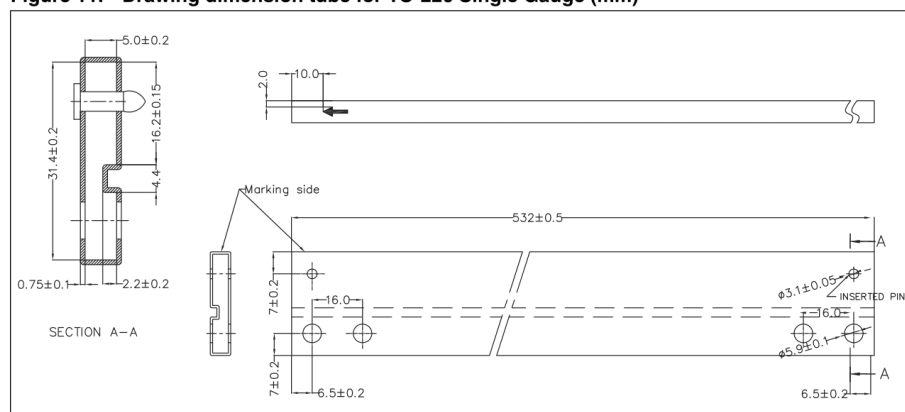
Drawing dimension tube for TO-220 Single Gauge (mm)
